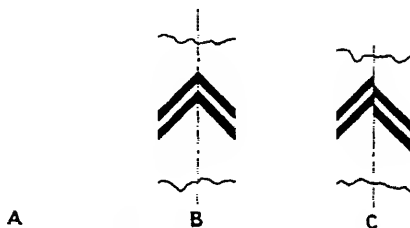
Varieties of herringbone gear teeth. A, parted tooth; B, continuous tooth; C, staggered tooth.
